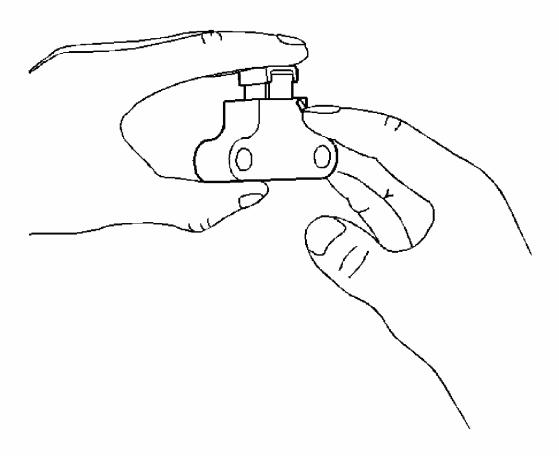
Collapsing Primary Camshaft Drive Chain Tensioner Courtesy of GENERAL MOTORS CORP.
